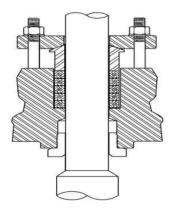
Cross-section of a typical valve packing chamber with packing rings installed.
